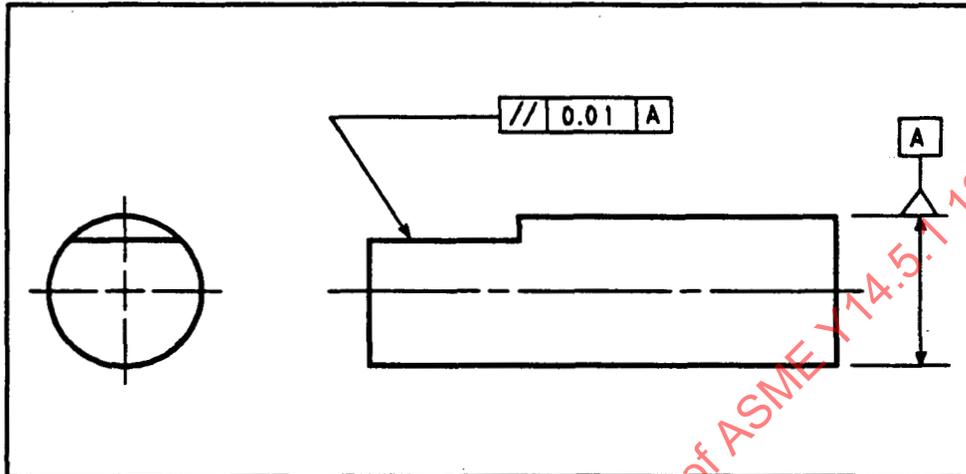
PLANAR PARALLELISM OF A PLANE; PRIMARY DATUM AXIS; NO SECONDARY DATUM SPECIFIED
